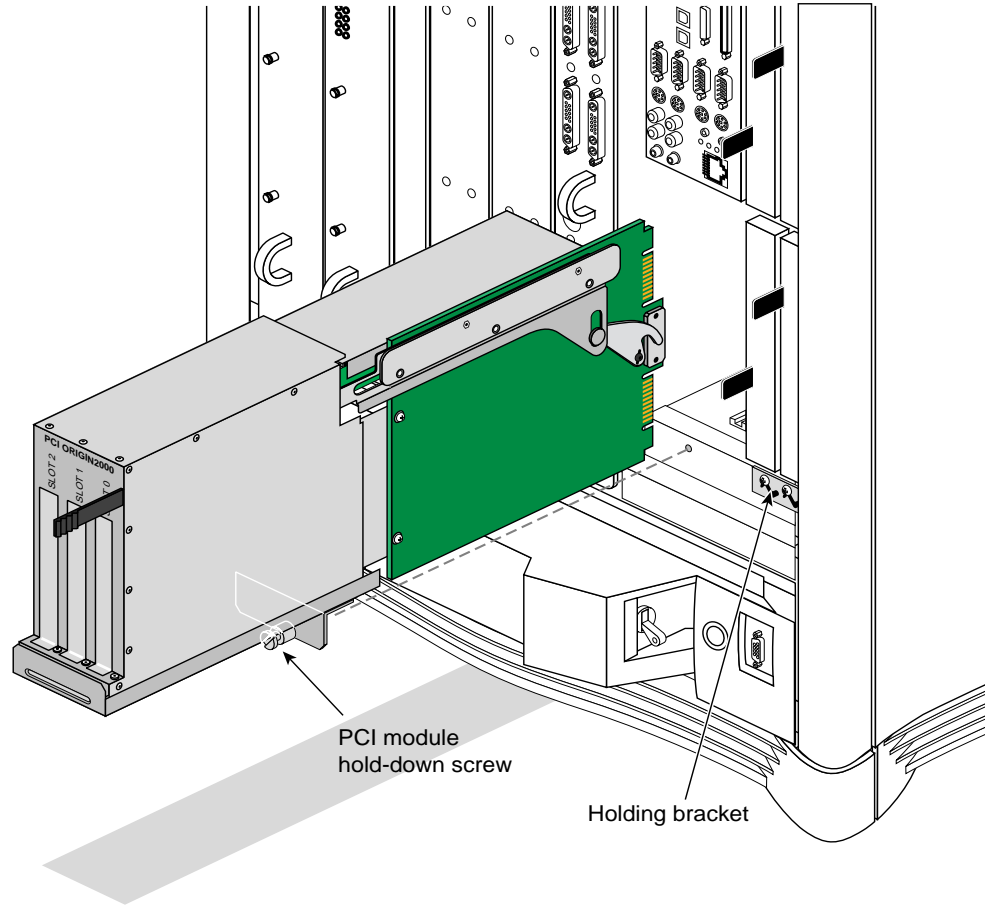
Removing the PCI Module (Adapter) From the Chassis
